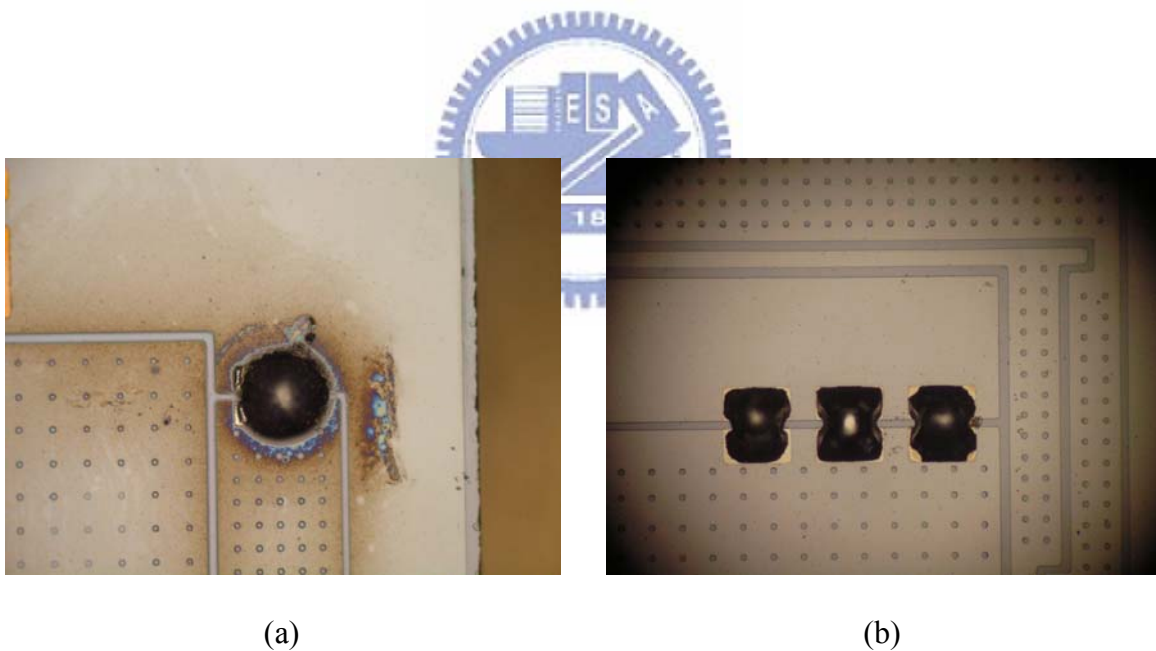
Solder ball place on gold pad (a) pre-melt with flux, (b) clean by water
